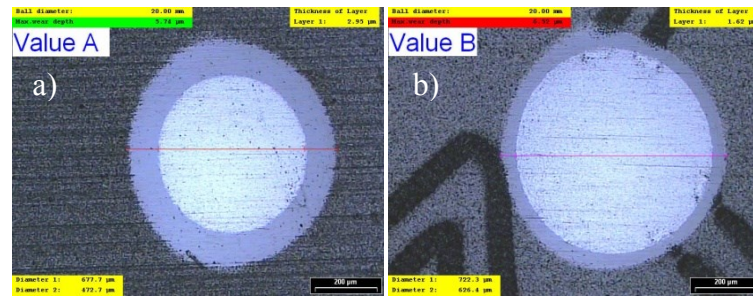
Pictures related to the measurement of coating thickness (a) flank face and (b) rake face
